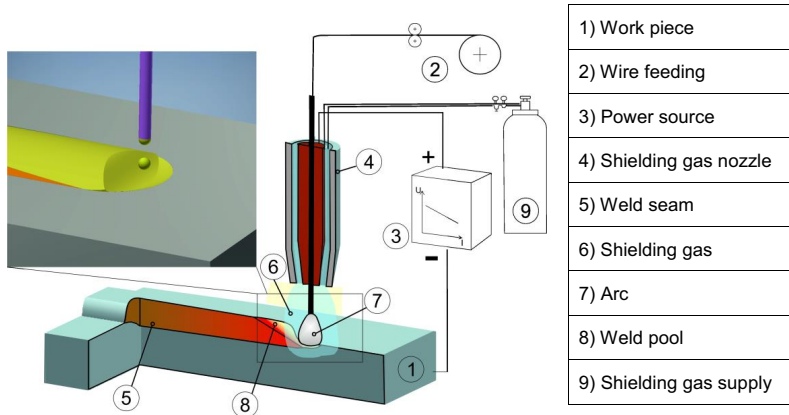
Schematic of the Gas Metal Arc Welding process [MOK19]
